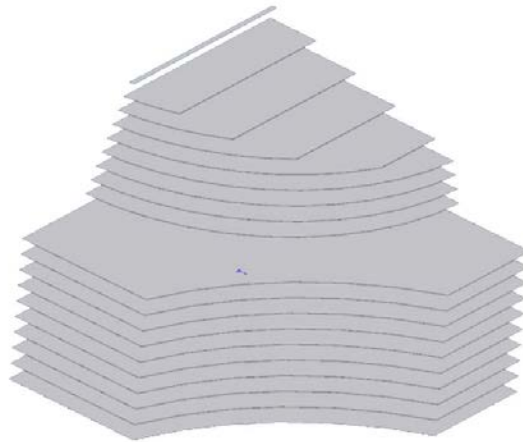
Simulation of two-dimensional weld layers that make up the final three-dimensional net shape
